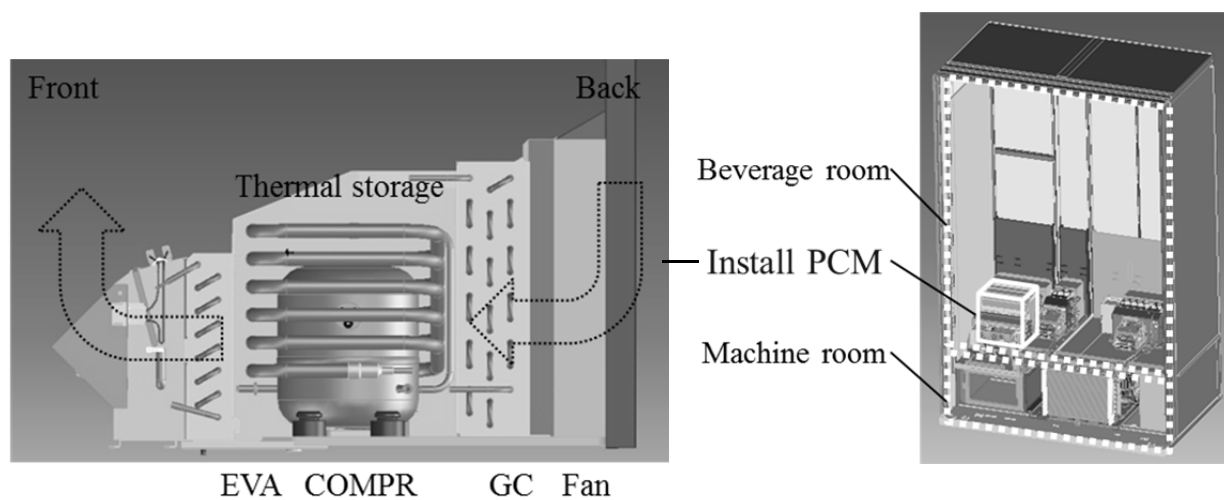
Design drawing of thermal storage tank for heating room.
